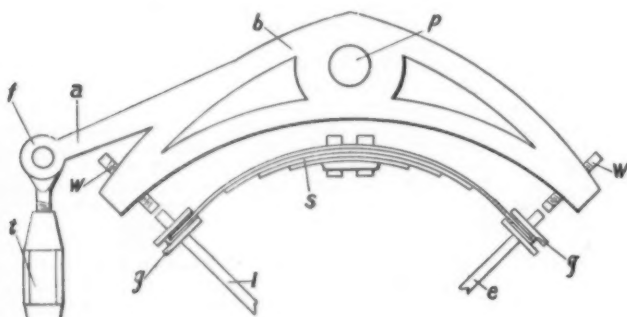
VALVE GEAR OF THE FIAT RACERS.
